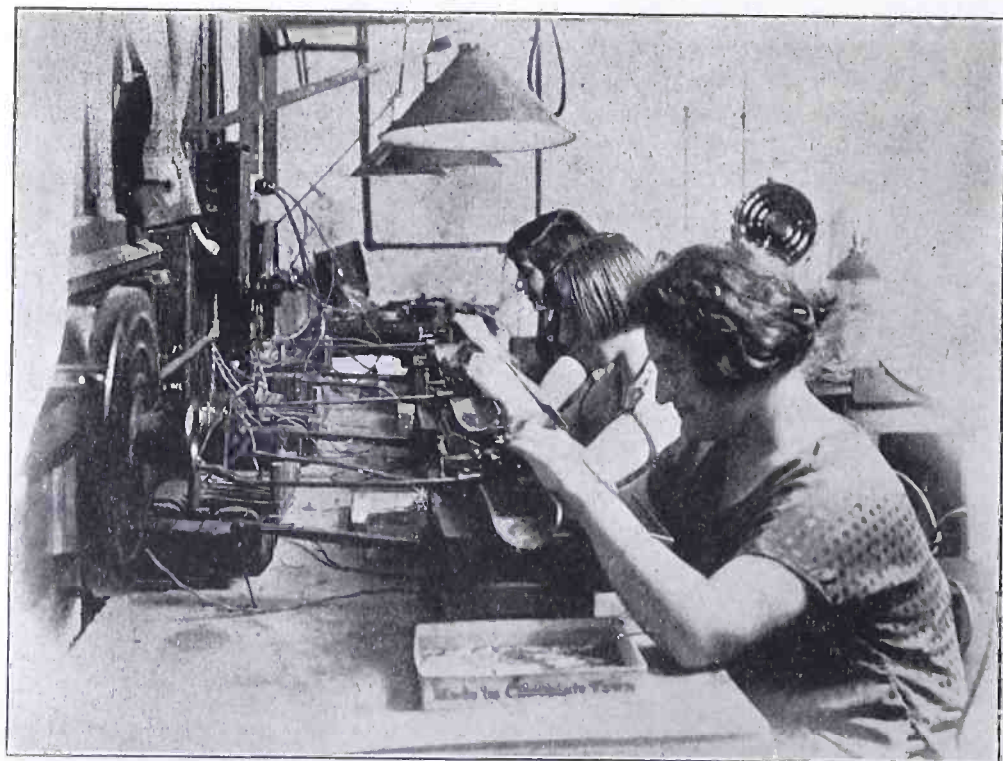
Bob-haired Bandits Welding Nickel Plate and Grid Supports Onto Copper-clad Sealing-in Wires
